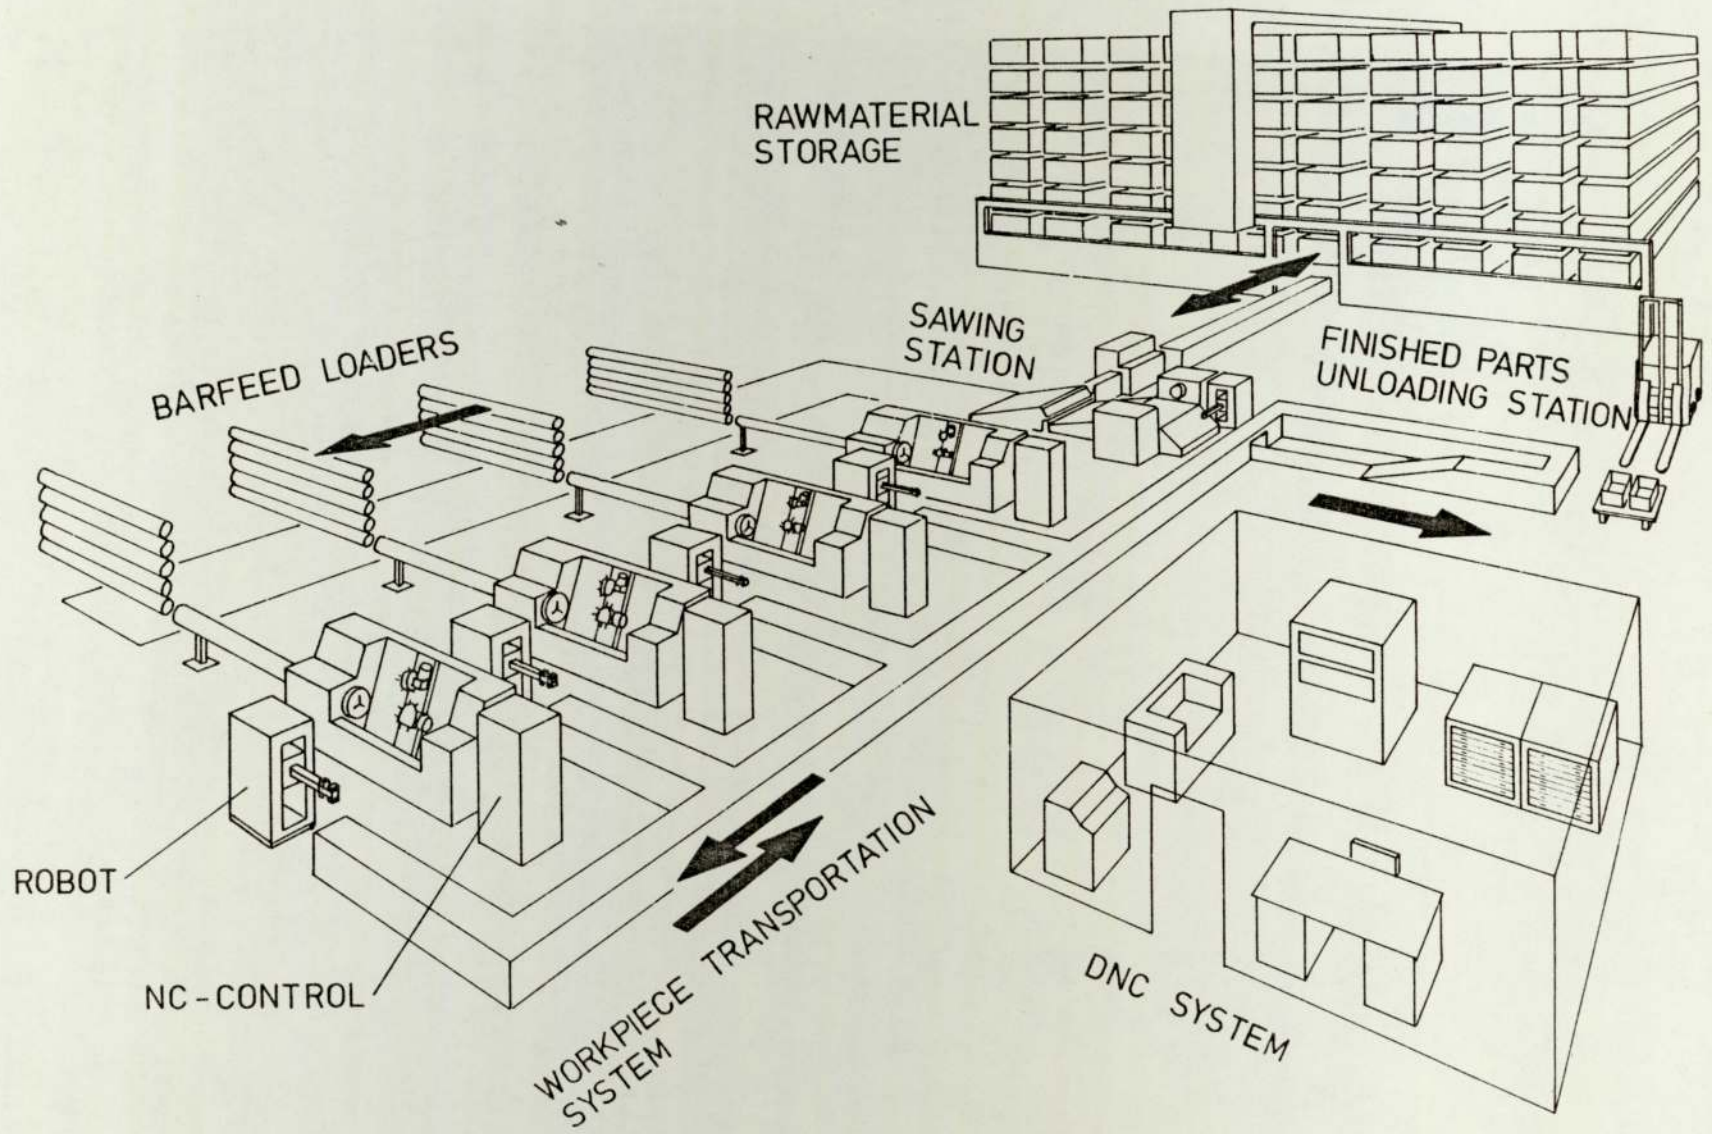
MANUFACTURING SYSTEM FOR ROTATIONAL PARTS
